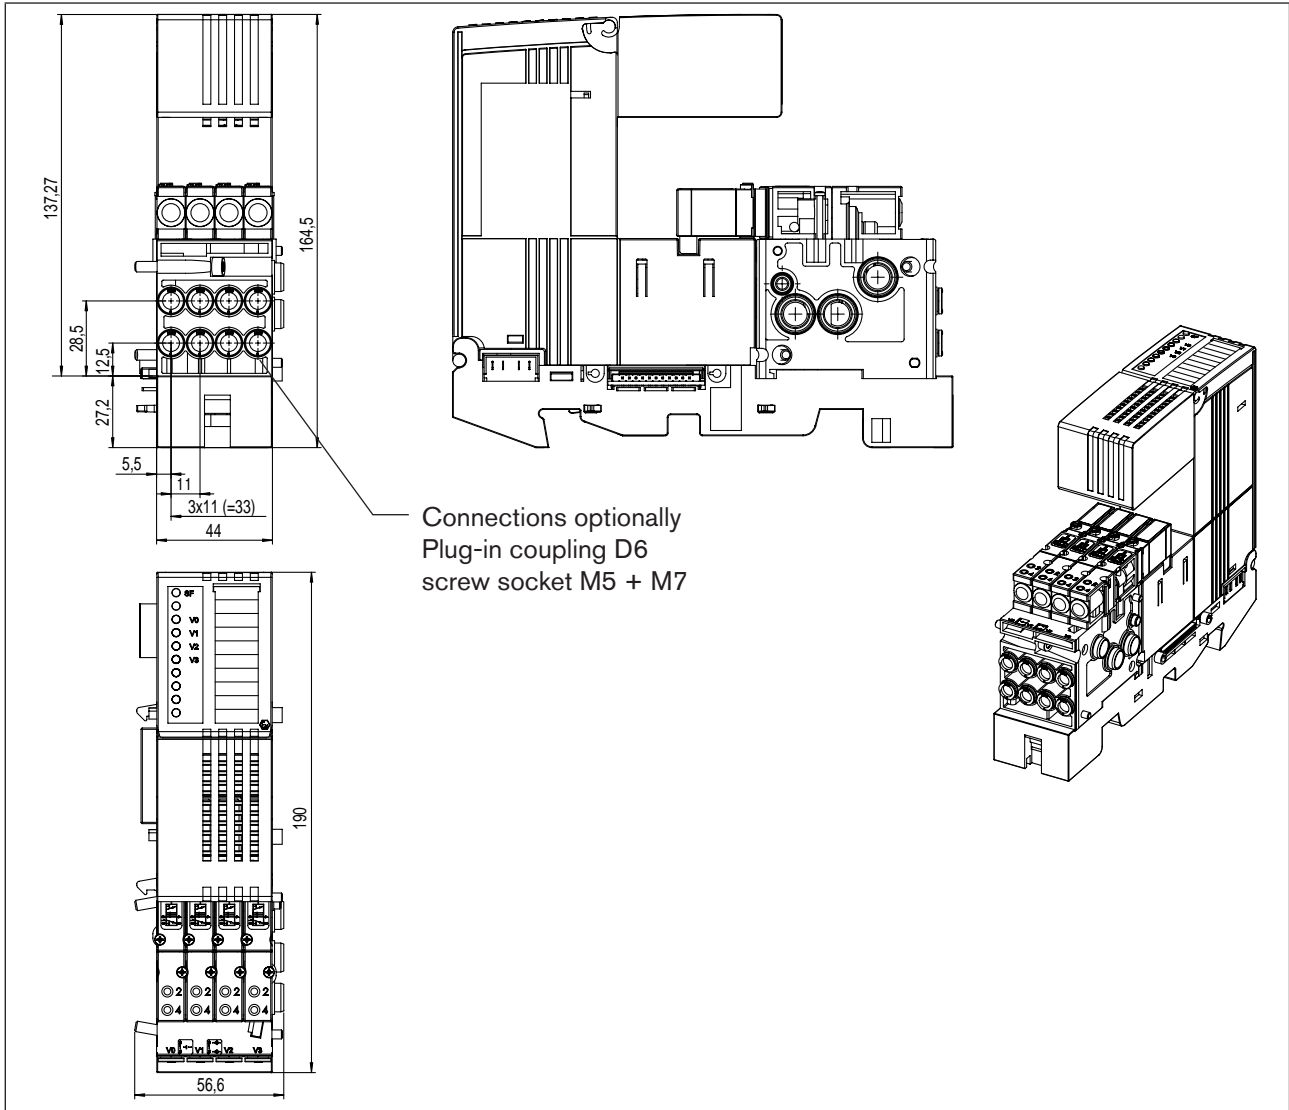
Dimensions [mm] - Valve segment (example: station width 44 mm)
